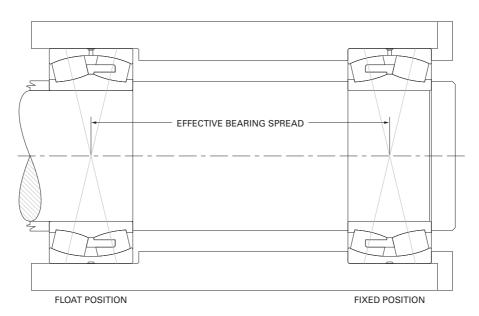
Typical mounting configuration for spherical roller bearings showing the position of effective load carrying centers.
